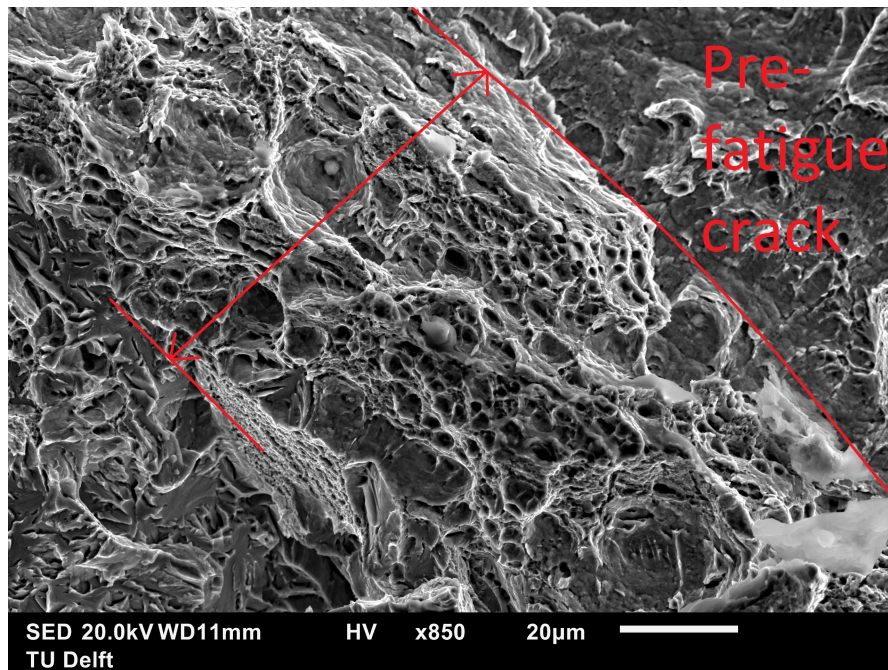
Fracture surface showing voids next to the crack (RB11)
